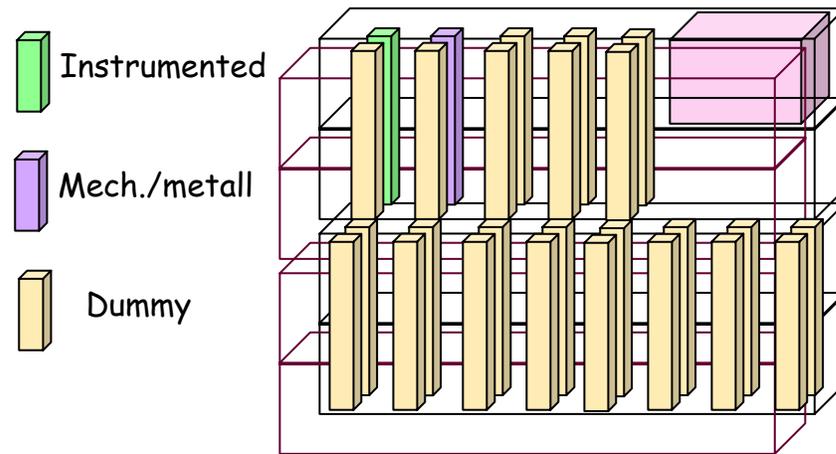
Racking pattern of cast aluminum A356 engine heads in a continuous furnace [19]
